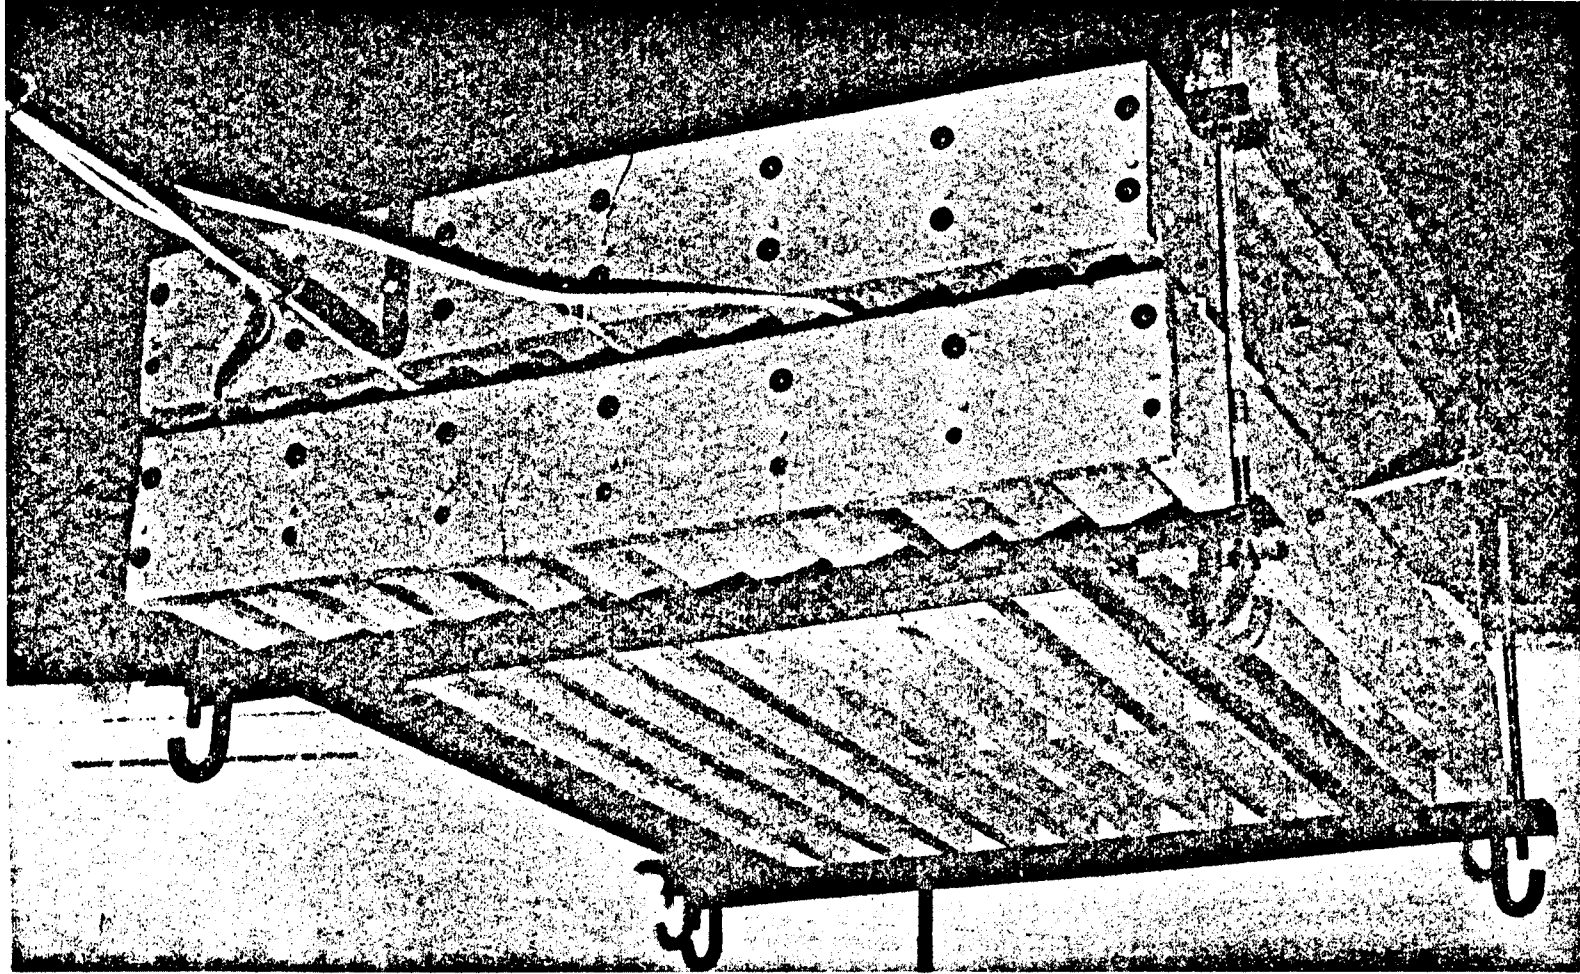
Flat Brazing Fixture Fabricated from 1" Thick Asbestos Cement Board
